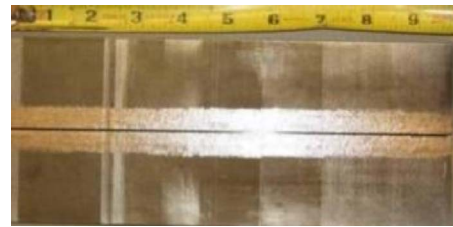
Plate of 247.7 mm length with 1.5 mm groove machined in the center
